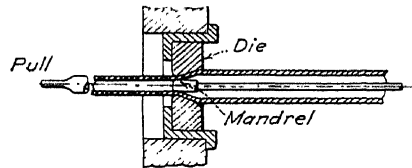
Sketch showing relative position of die and mandrel in the cold drawing of tubes. (National Tube Co.)
